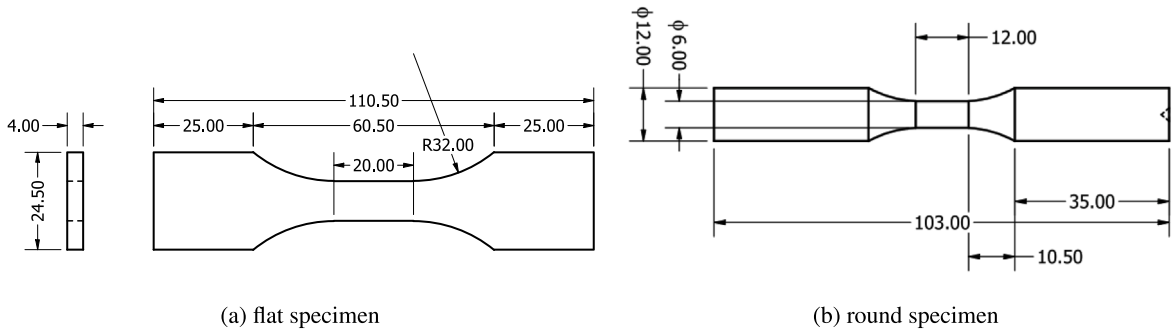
Fatigue and tensile specimens geometry according to ASTM E466 [34], dimensions in mm.
